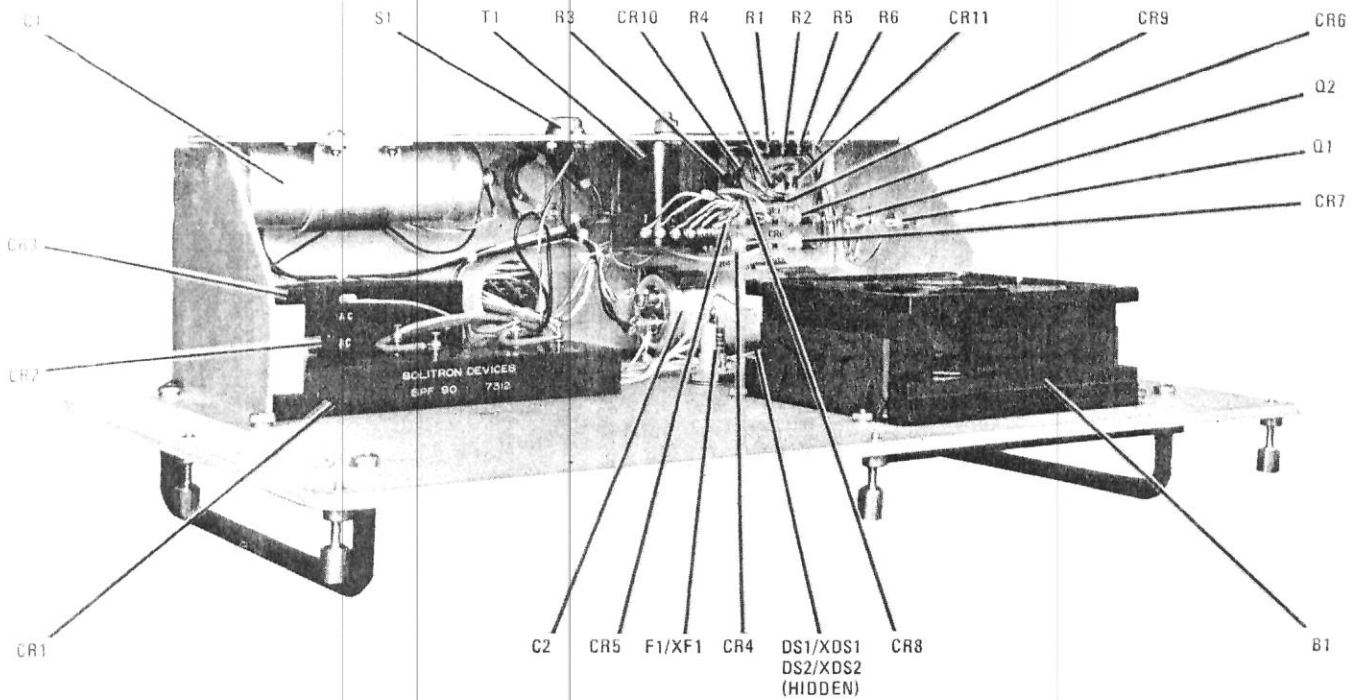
Front Panel Assembly A1, Component Locations (Units with SN-0341 to SN-0649)
